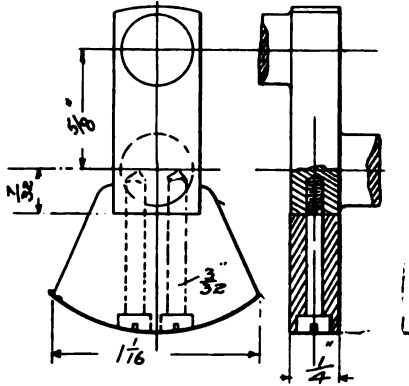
CRANKSHAFT WITH SEPARATE COUNTERWEIGHTS.
